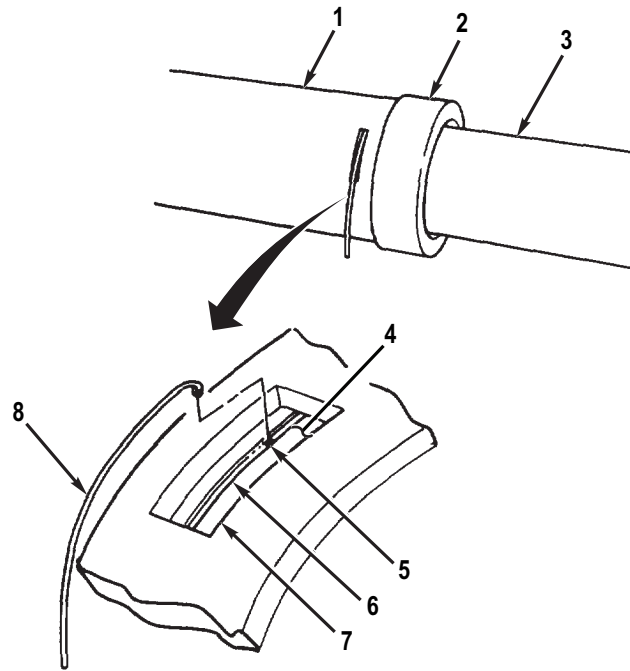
Hydraulic Positioning Cylinder (with Side Lift Kit) Lockwire Assembly.
